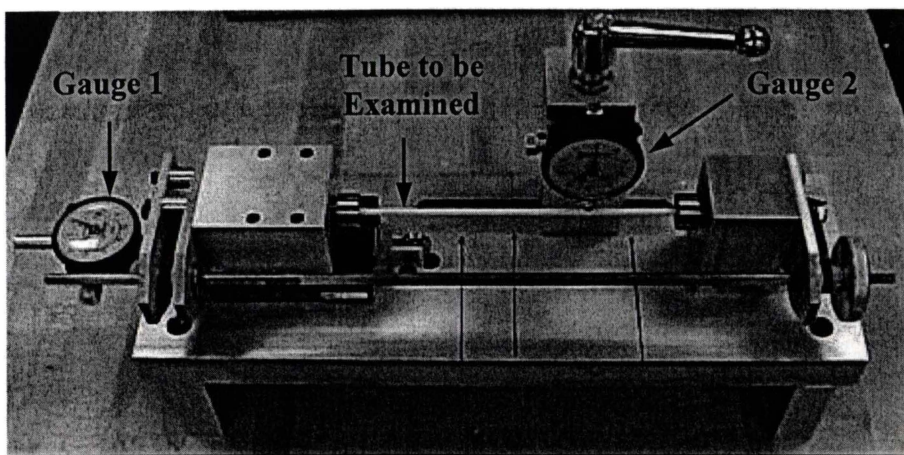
Device for Examining Sintered Tube Dimensions.
